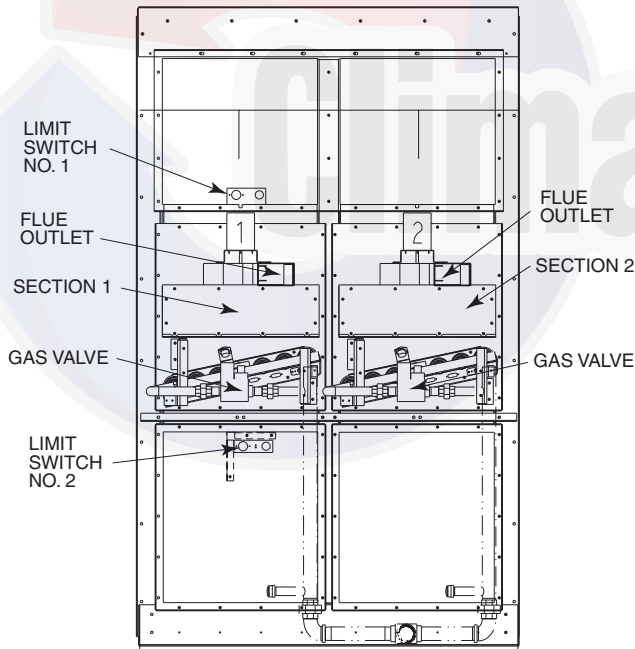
Gas Section Detail, Sizes 055-100 — Low Heat
